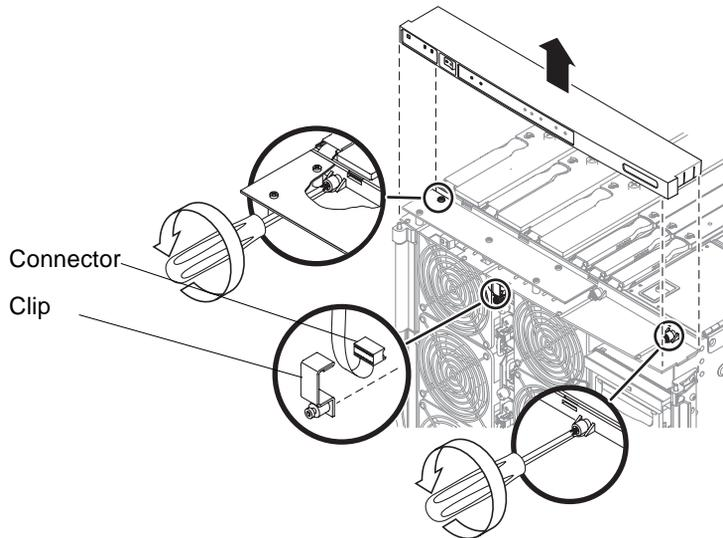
Removing the System Indicator Board Clip and Connector
